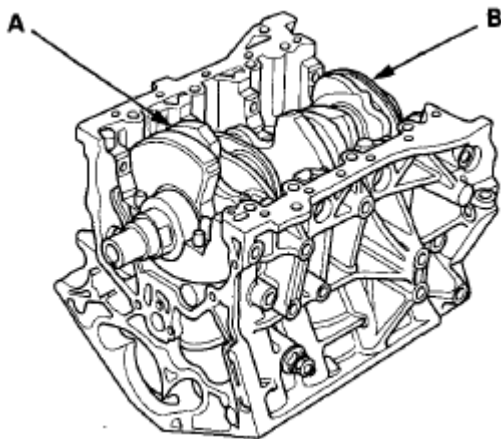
Identifying Crankshaft And CKP Pulse Plate
